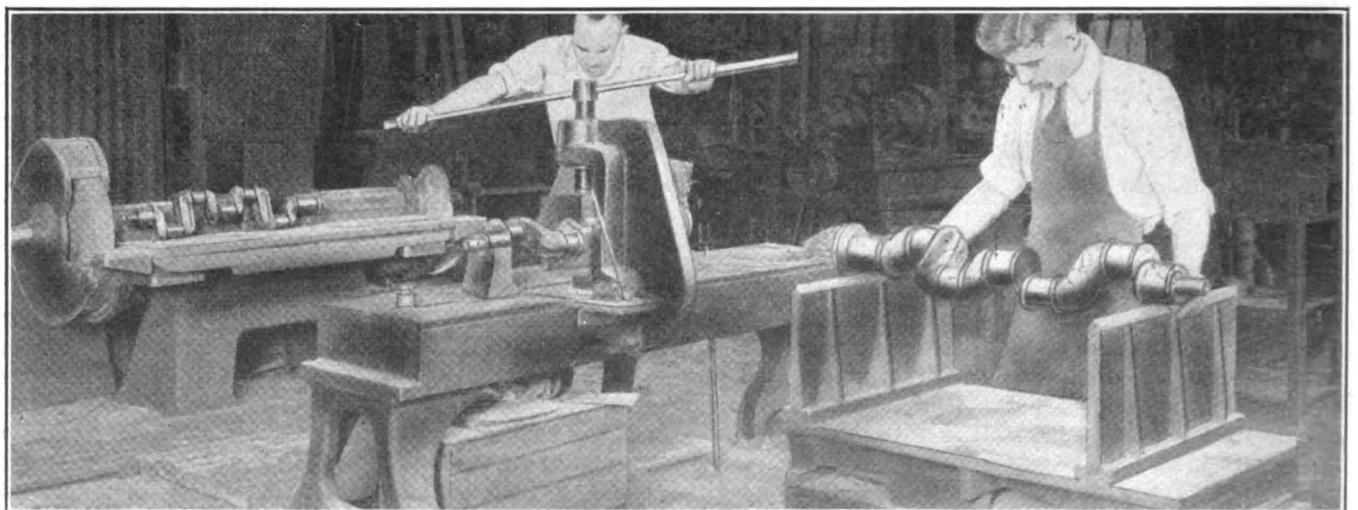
BALANCING AND STRAIGHTENING THE SHAFT
